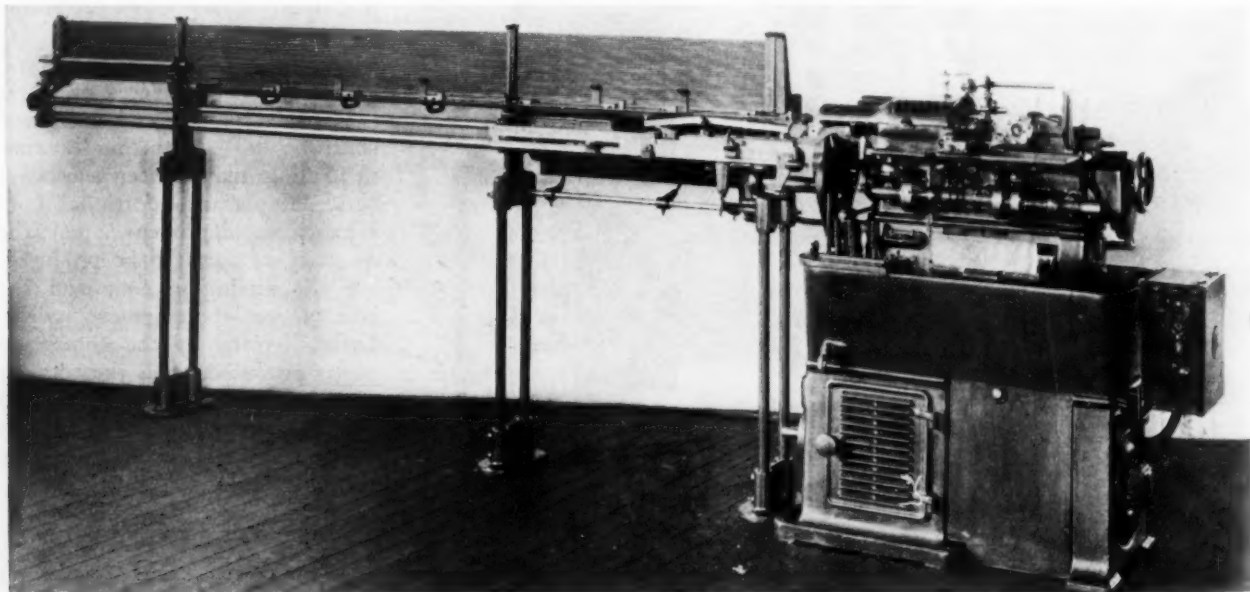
MAGAZINE-FEED ATTACHMENT FOR AUTOMATIC SCREW MACHINE
